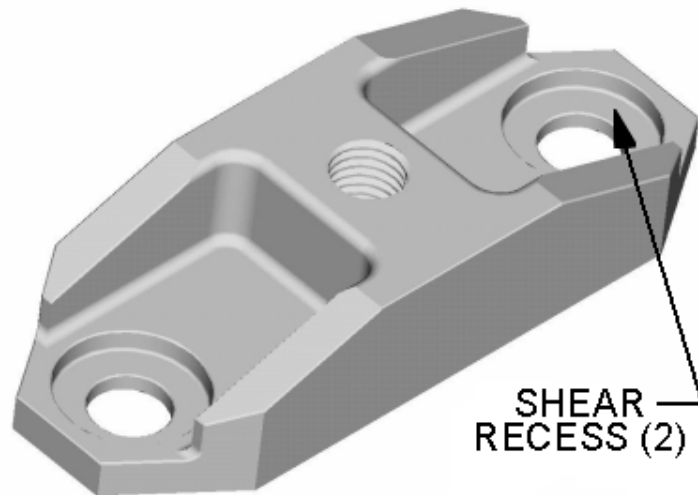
Heavy-duty Fitting, Bottom View Showing Shear Recess for Medium-duty Fittings
